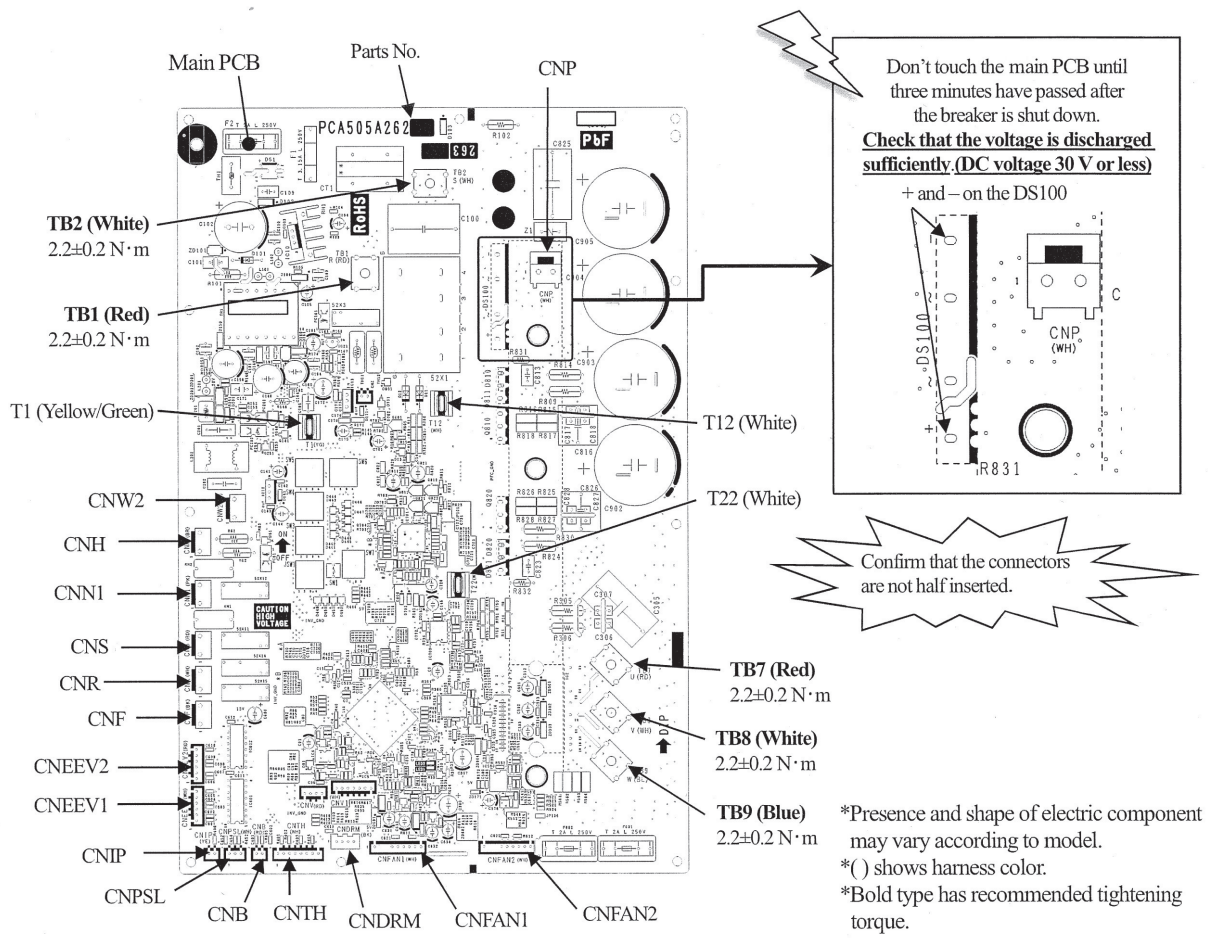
Parts arrangement view of main PCB and voltage measurement points
